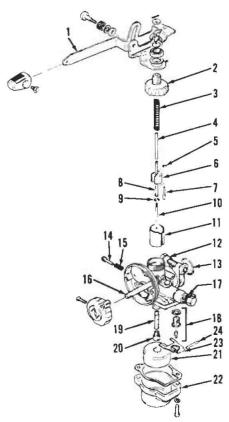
Exploded view of carburetor used on models prior to 1987. On 1987 and later models, carburetor is equipped with a pilot air screw (Fig. SZ1-2) for low speed mixture adjustment.
